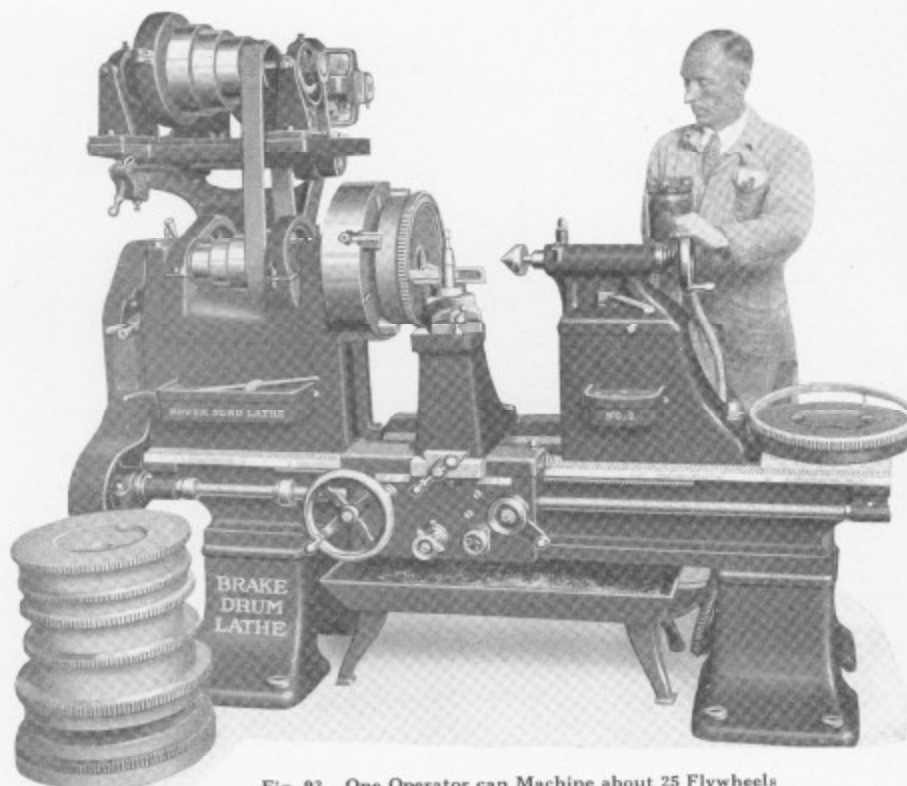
One Operator can Machine about 25 Flywheels for Ring Gears in 8 hours
